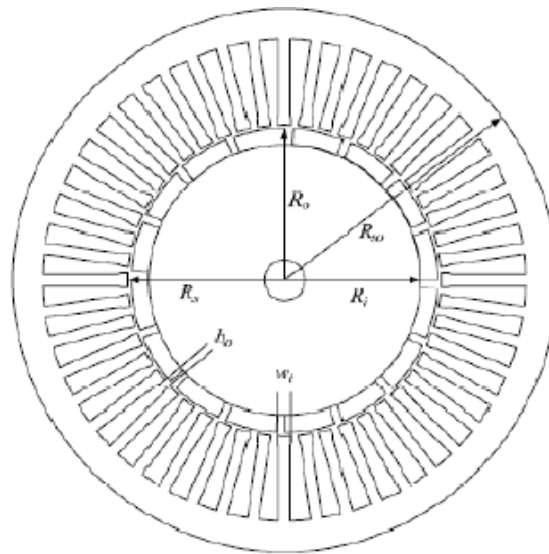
Slotted radial flux machines with inner rotor configuration [68]
